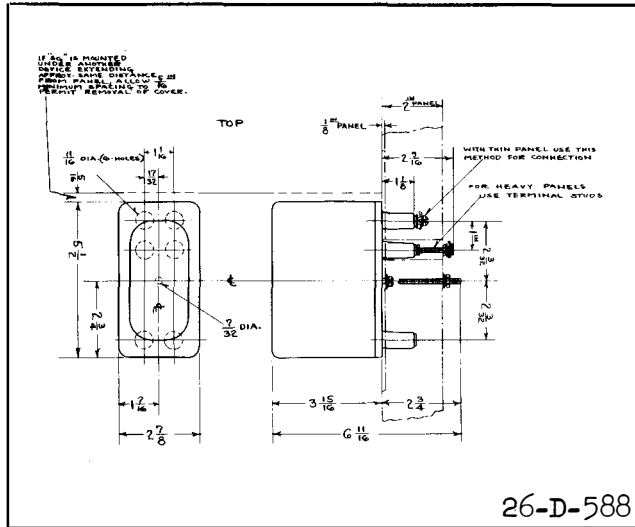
Outline & Drilling Plan for the Type PS-4 Auxiliary Unit in the Projection Molded Case.
